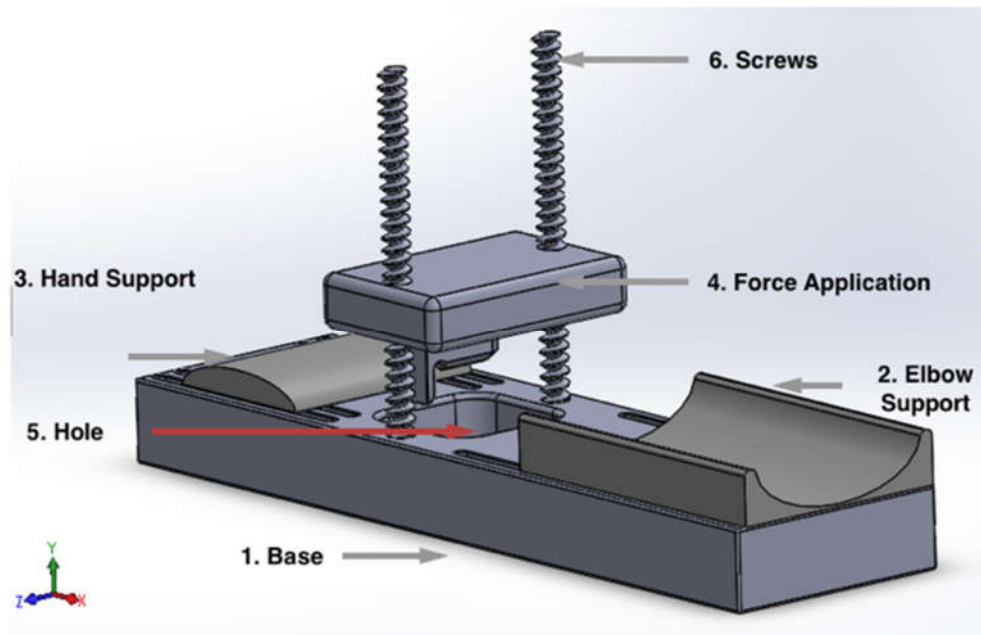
CAD Model of the Updated Bending Design with the major components labeled
